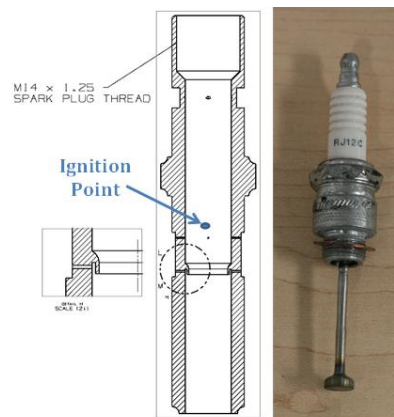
Combustion Chamber cross-section and modified spark plug
